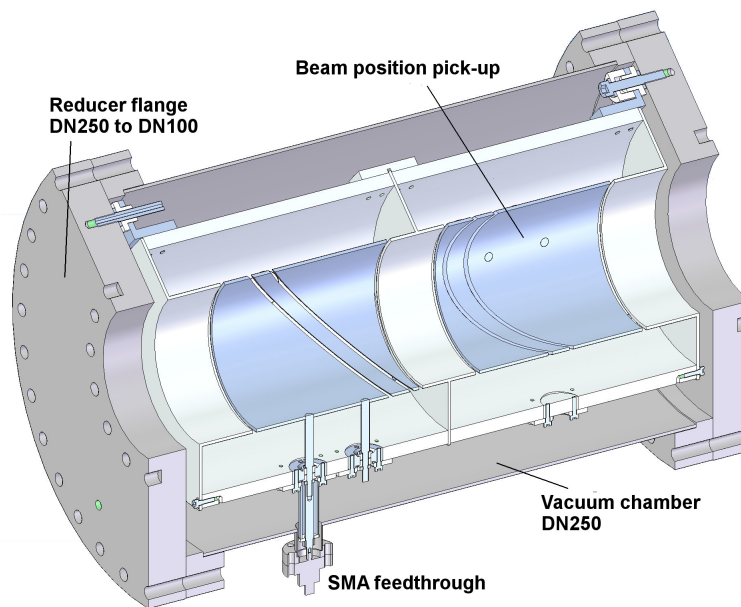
A cross-section view of the pick-up installed in the vacuum vessel.
